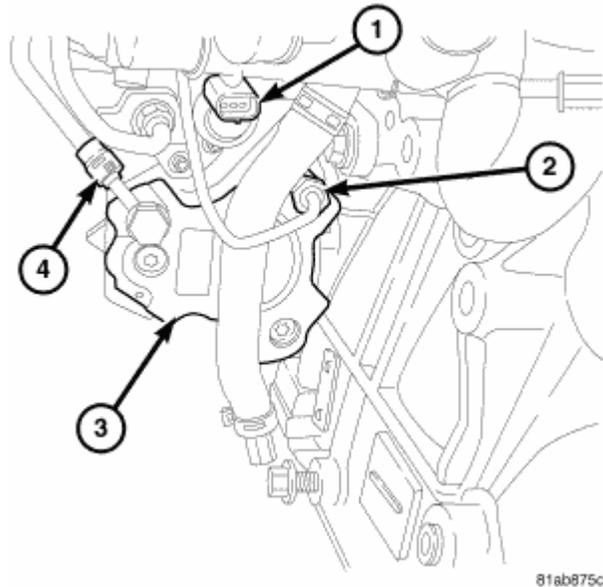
Identifying High-Pressure Fuel Sensor, Electrical Connector & Fuel Lines
